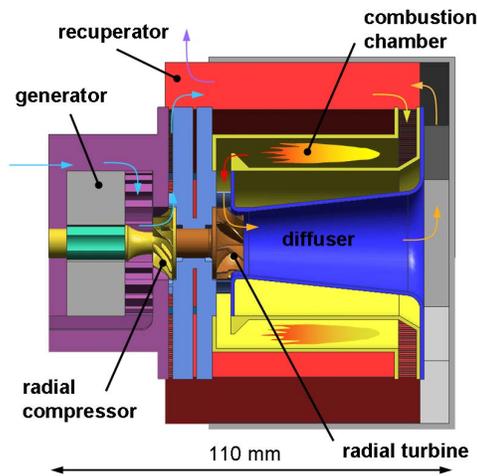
Sectional drawing of basic gas turbine layout with generator
